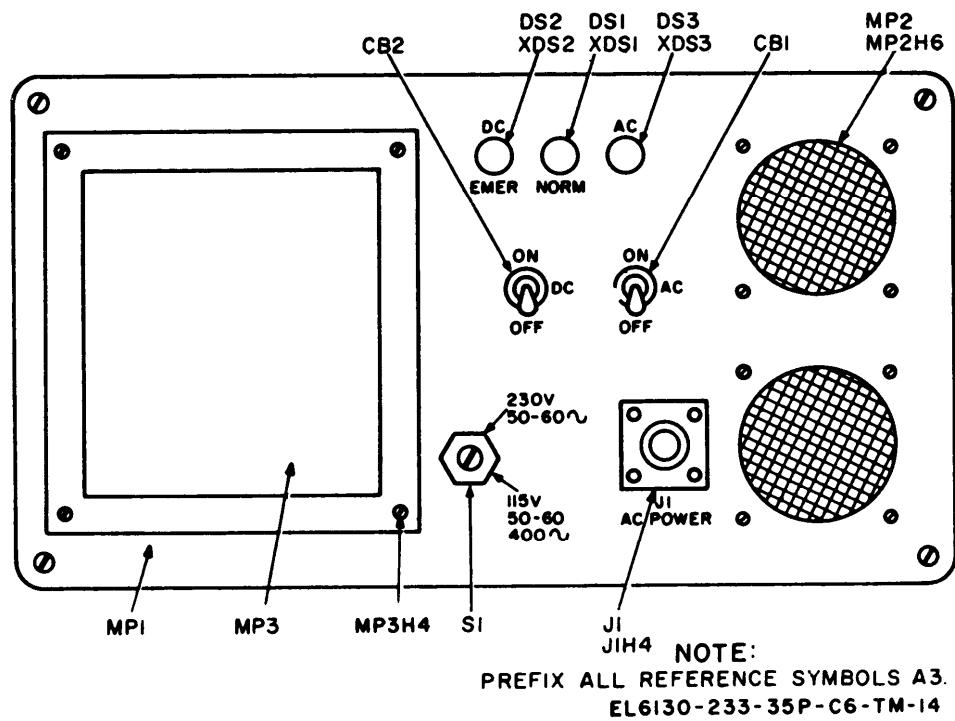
Front Panel Assembly of Power Supply PP-2953C/U.
